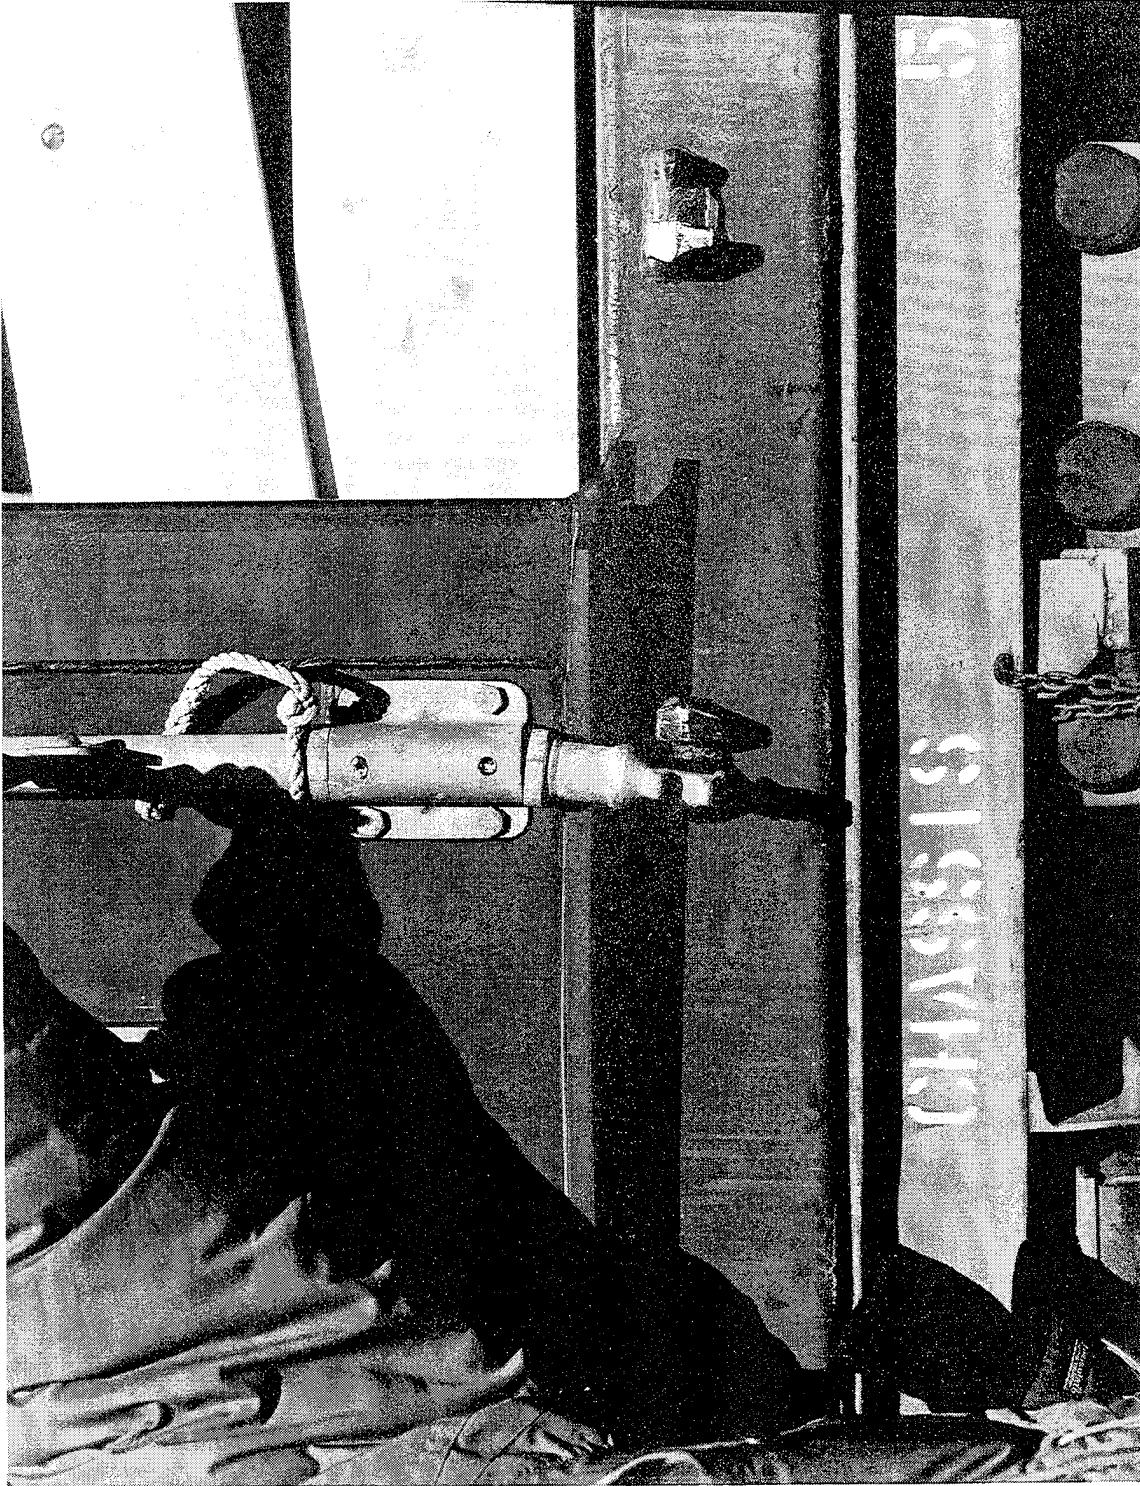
This photo shows the damage to the container door closure and locks. Note the bend in the lower latching mechanism of the lock assembly. Damage was due to the inadequate strength in blocking with three laminated 2- by 8-inch boards.
